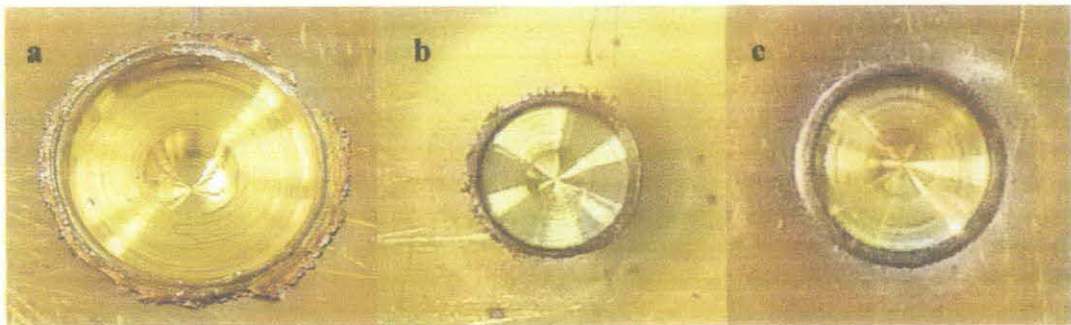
(a) Spot weld joint of copper alloy to copper alloy with 2000 rpm (b) Spot weld joint of copper alloy to copper alloy with 3000 rpm (c) Spot weld joint of copper alloy to copper alloy with 4000 rpm
